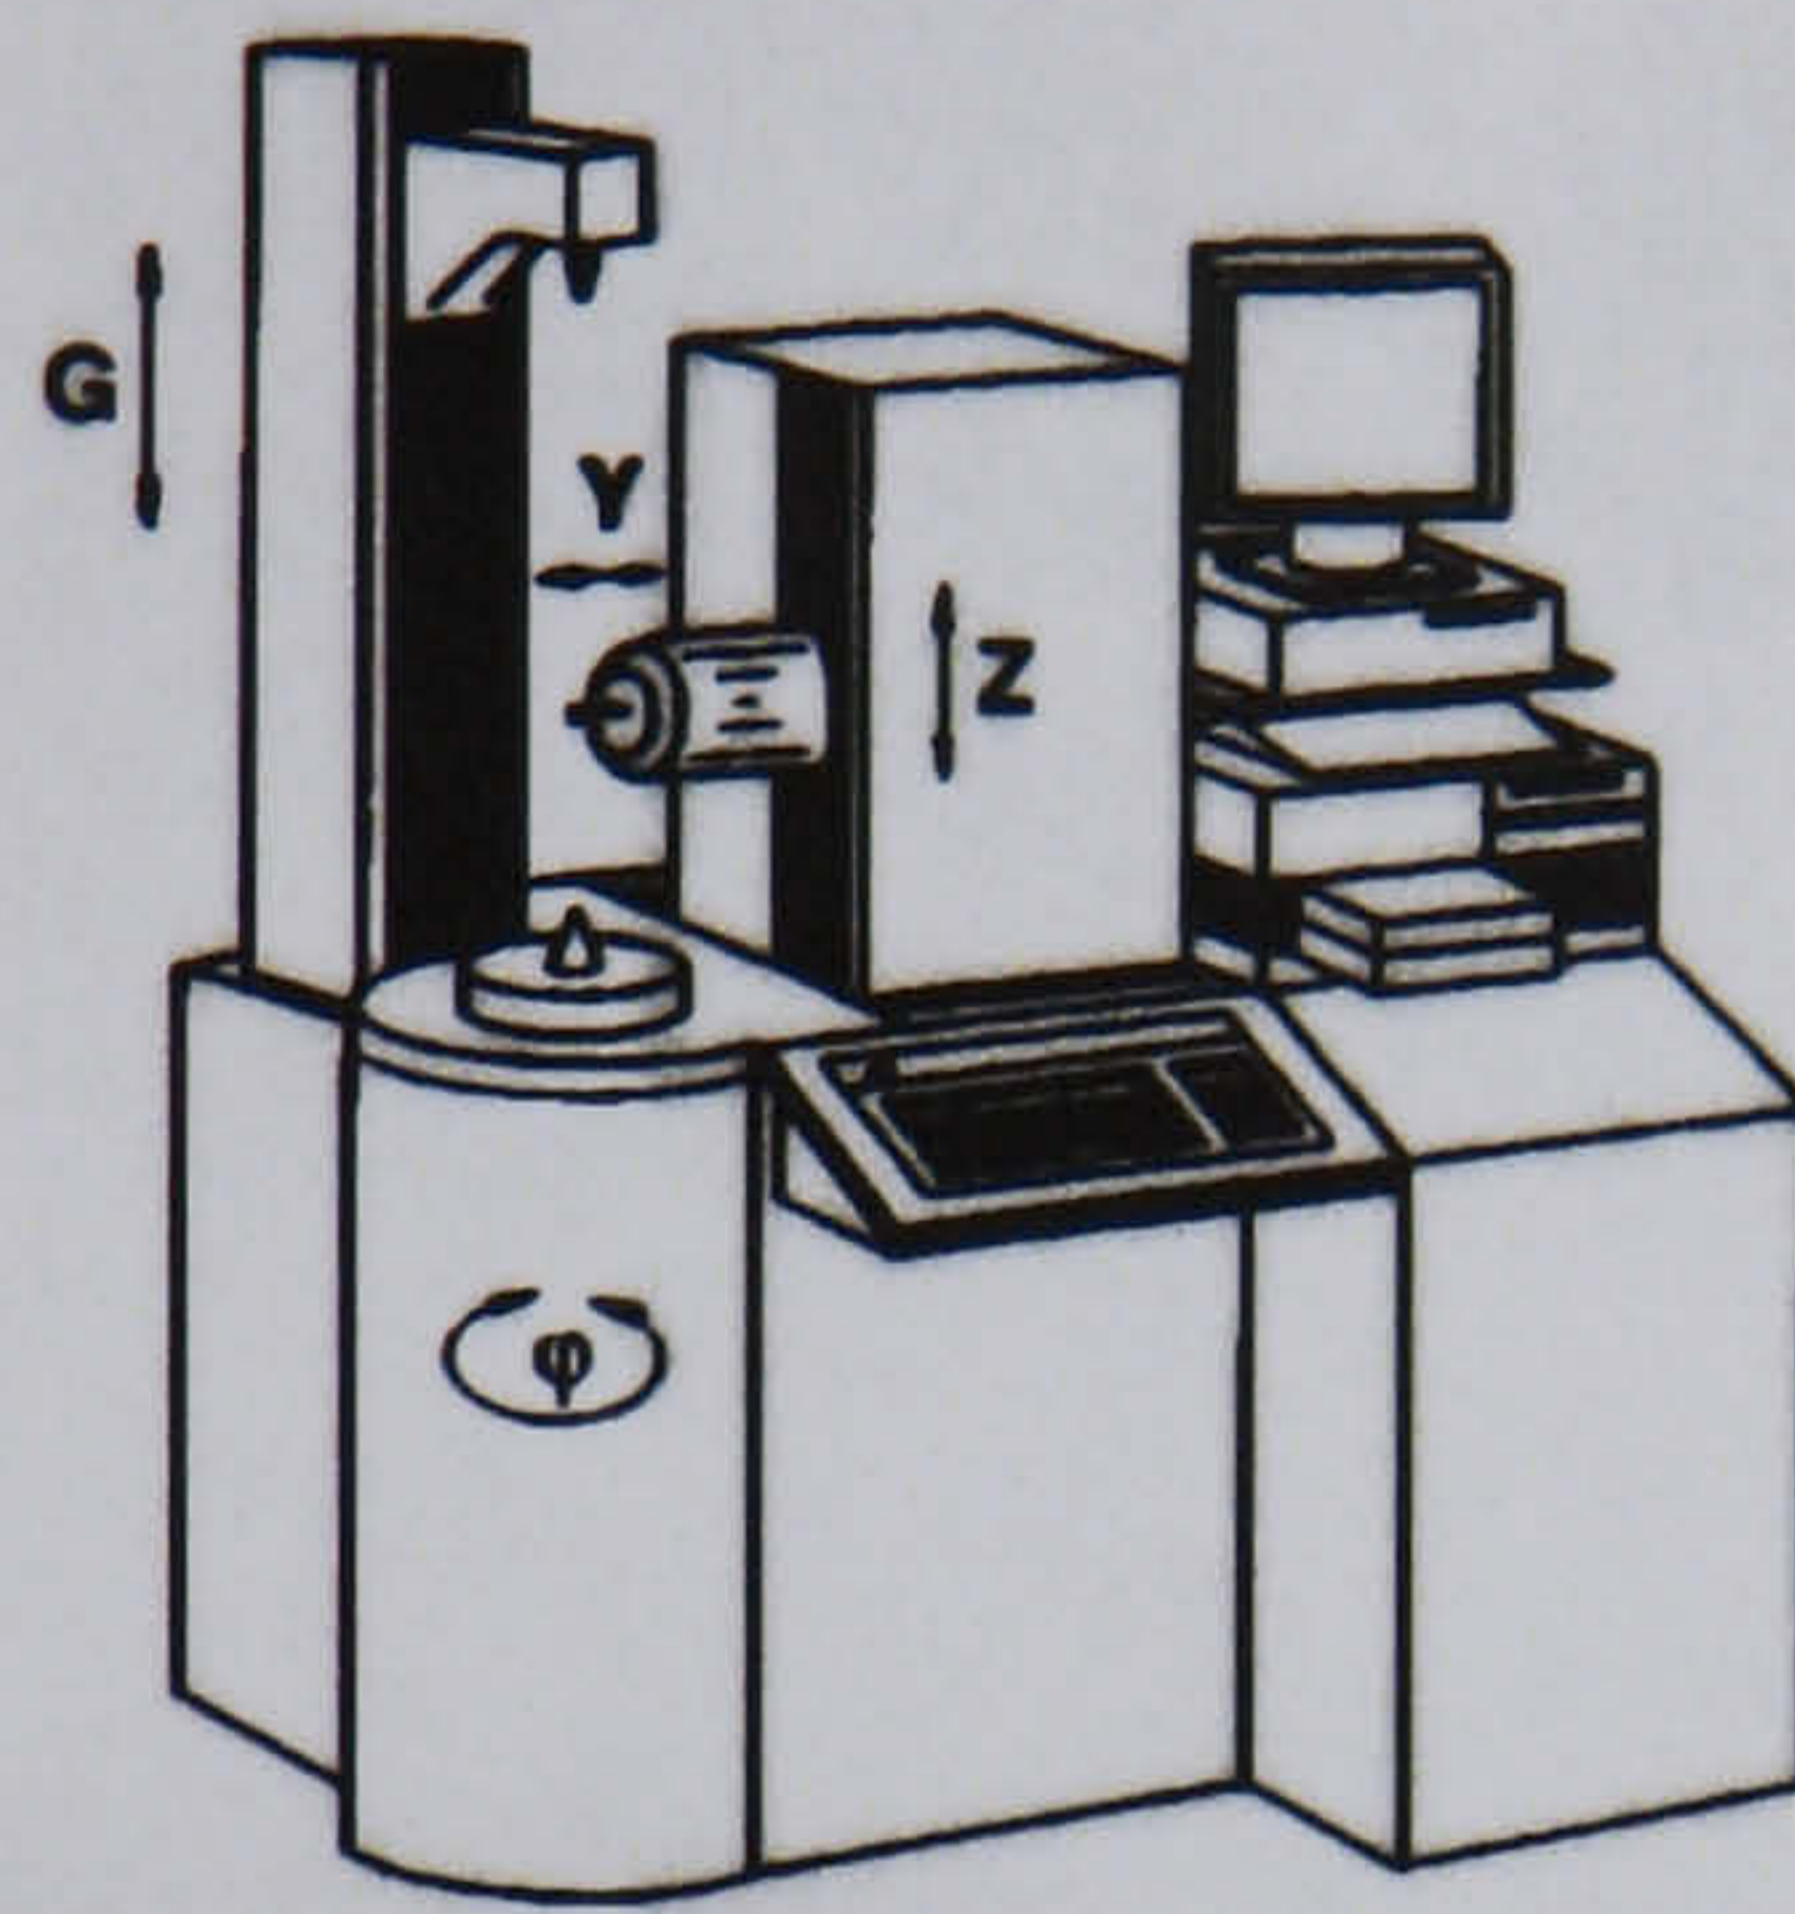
An example of a 3-axis CNC gear measuring machine [Klingelnberg]
